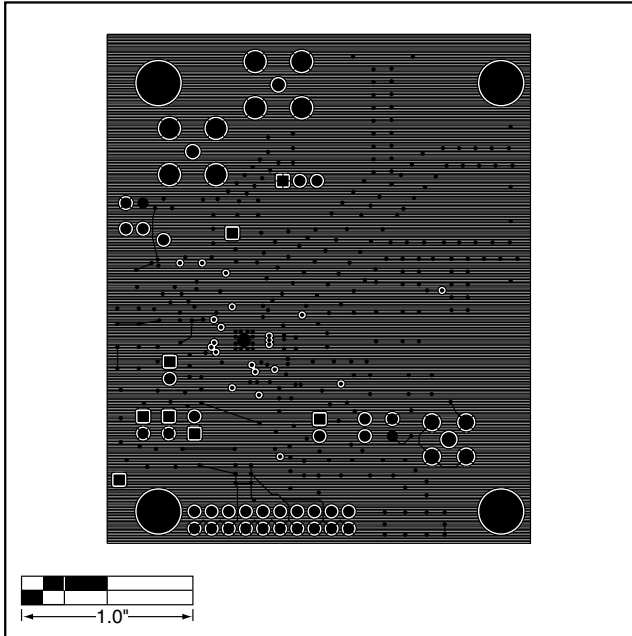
MAX2150 EV Kit PC Board Layout—Layer 2
